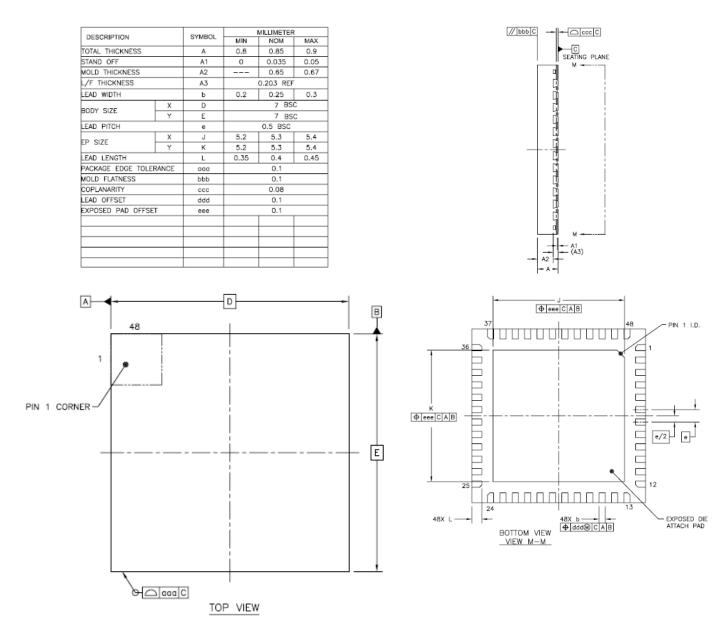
QFN (7mm x 7mm) 48-pin Package Dimensions
